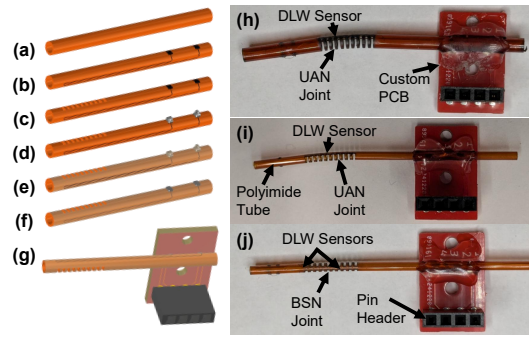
The sensing joint fabrication process (a) begins with stock polyimide tubing. (b) A laser is used to draw the sensor on the tube and (c) cut notches in the tube. (d) The contact pads are protected by silver epoxy before (e) the entire structure is coated with parylene-C. (f) The parylene is sanded off the contact pads, and (g) additional silver epoxy is used to assemble the sensing joint with the PCB. The images of the completed sensing joints: (h) Joint A, (i) Joint B, and (j) Joint C.
